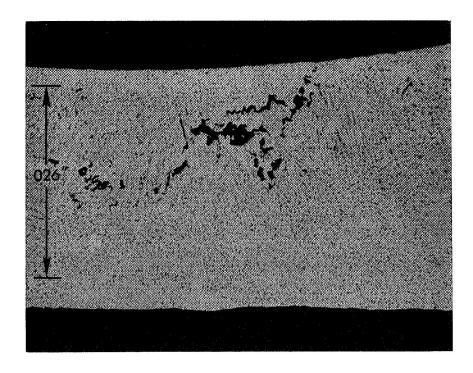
Weld Shrinkage in a Butt Weld in the 321 Stainless Steel Tubing Separating the Static and Flowing NaK Circuits 18 Feet Downstream From the Boiler Inlet
